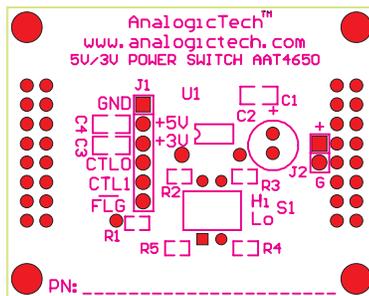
Evaluation board top side silk screen layout / assembly drawing
